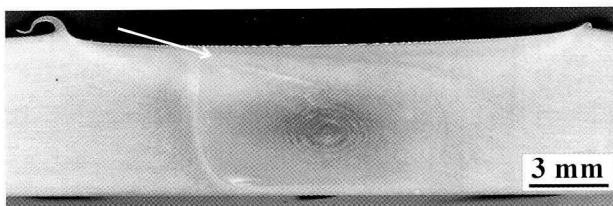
Cross section of alloy 5083 weld (advancing side on the right) made using  $D_{\text{shoulder}} = 20 \text{ mm}$  and  $\theta = 2^\circ$ . Arrow points to "embedded layer".
